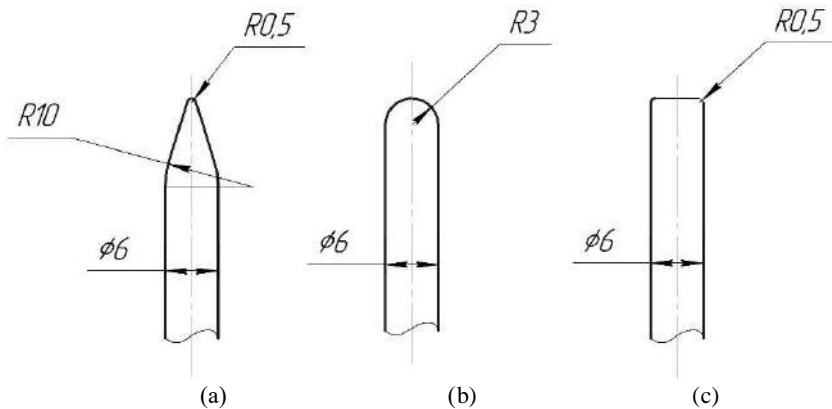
Punches: conical (a), hemispherical (b) and flat (c).
